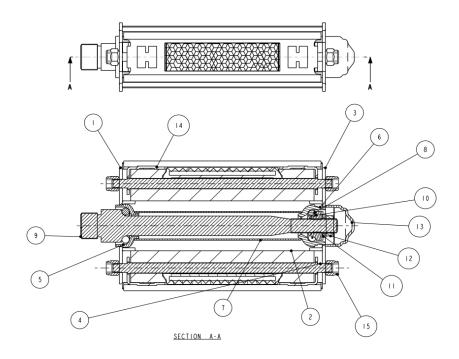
BLOCK TYPE PEDAL ASSEMBLY (SCHEMATIC)
